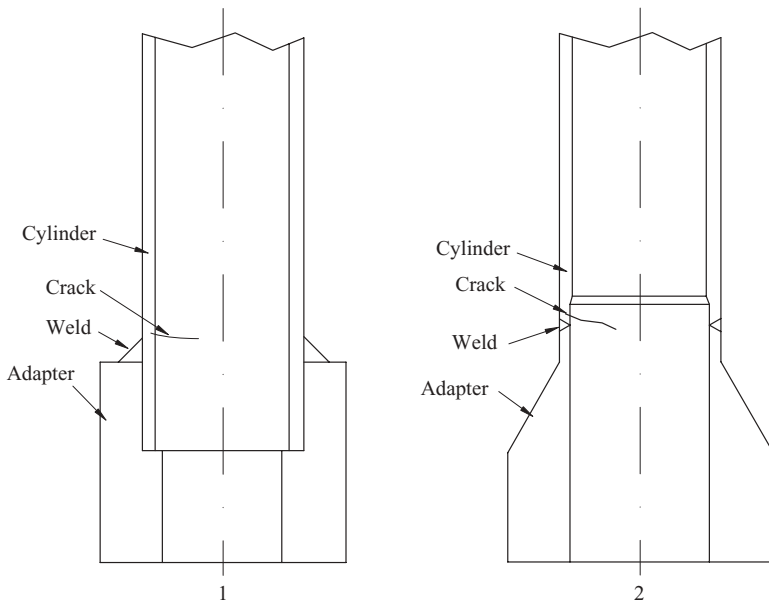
Hollow cylinders with the welded on adapters.
